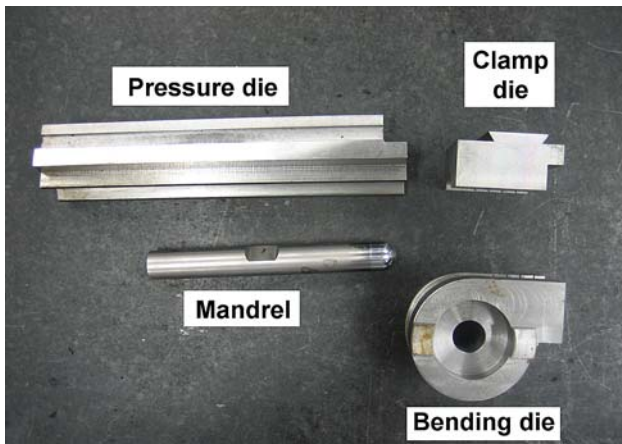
Dies of rotary draw bending equipped with surface booster system
